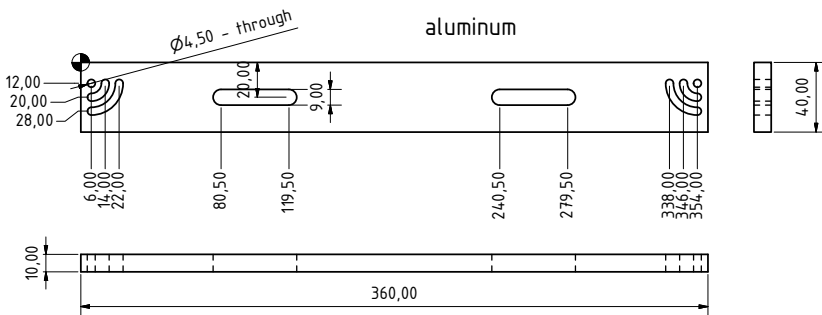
Drawing of the connection piece to the stacks in the vacuum chamber.
